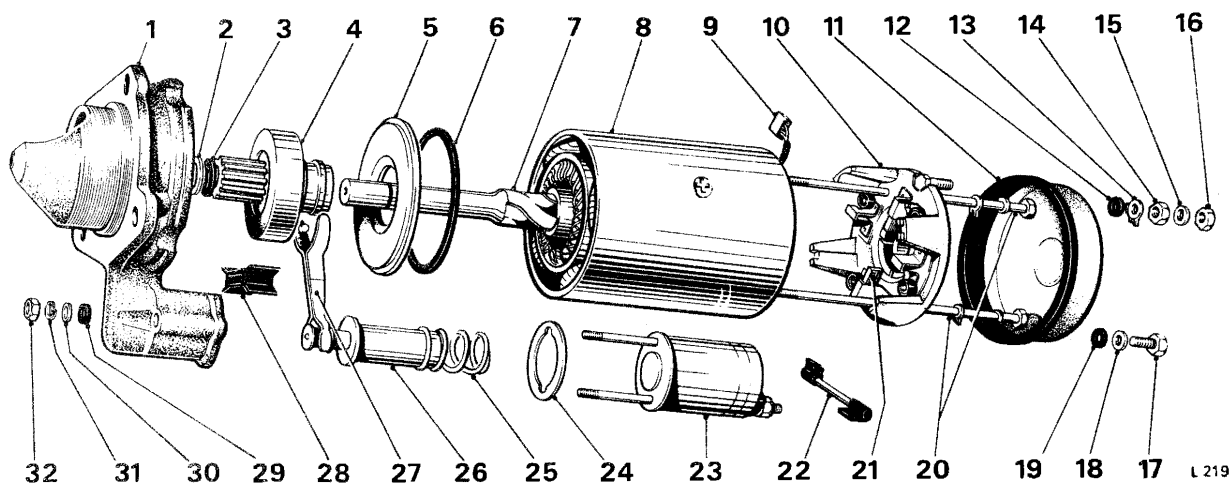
EXPLODED VIEW OF STARTER MOTOR
